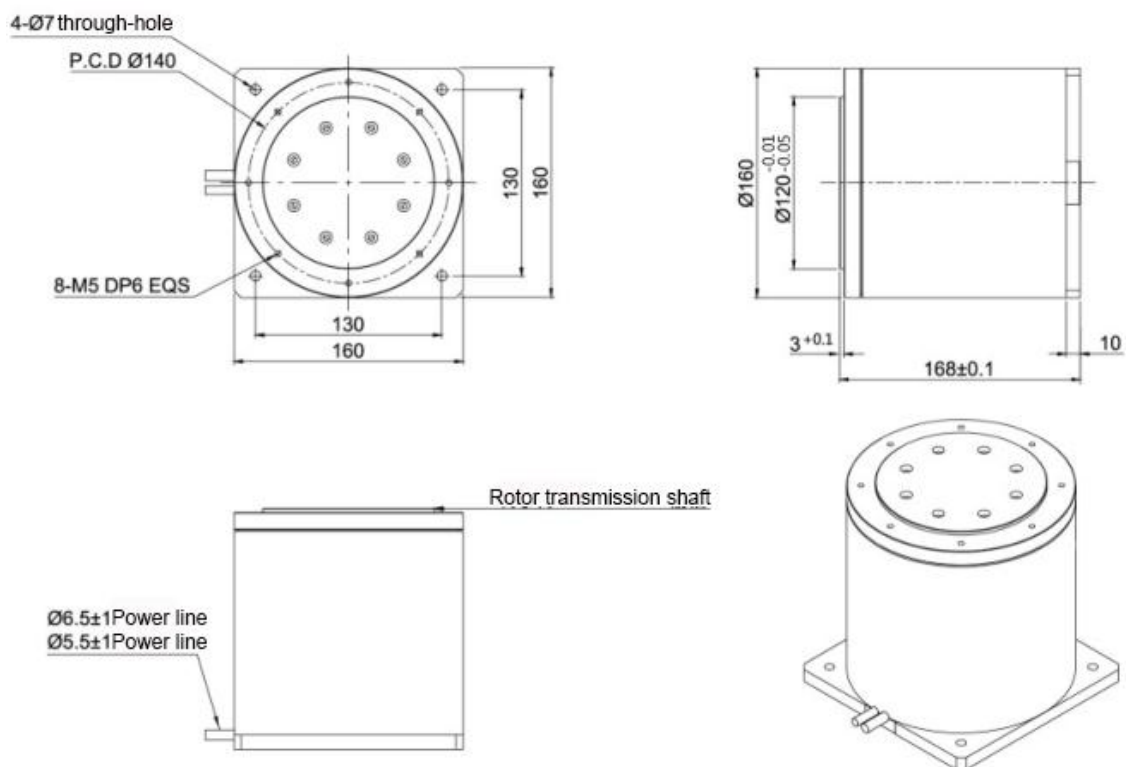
Outline dimensional drawing of WZCR-D160S-168 motor
